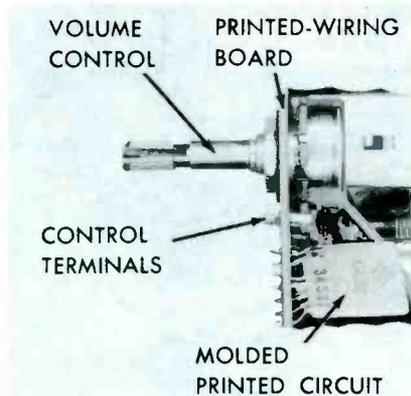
Volume Control and Molded Printed Circuit Employed in the General Electric Model 905 Radio.
